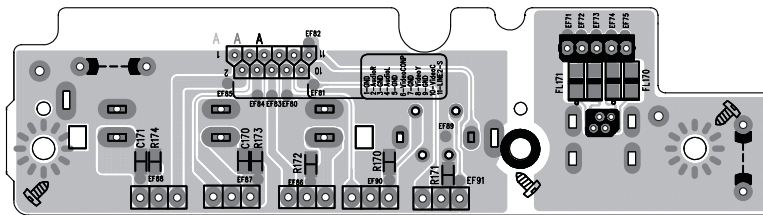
EU55 Front Jack PC Board (Bottom side)
